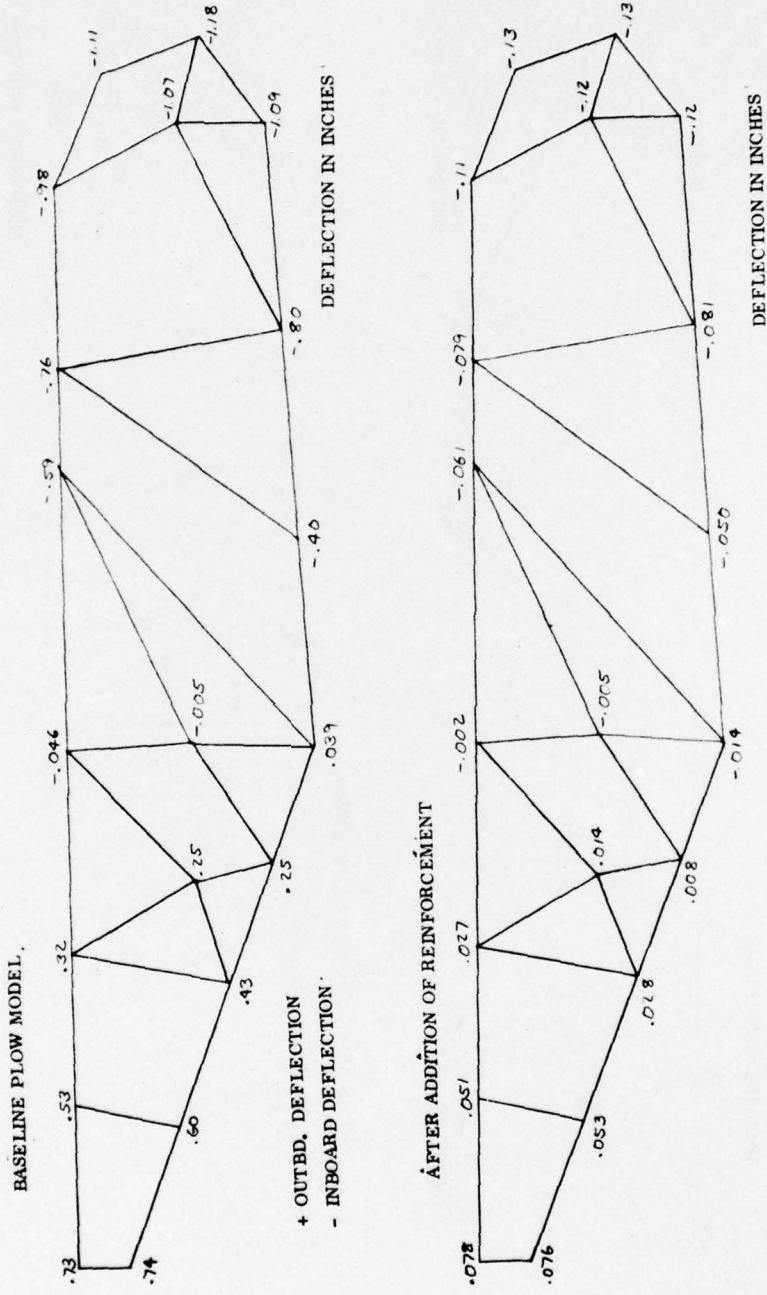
Mounting Bracket Grid Point Deflection Normal to Plane of Plate - Outside Piece TD 135932-4
